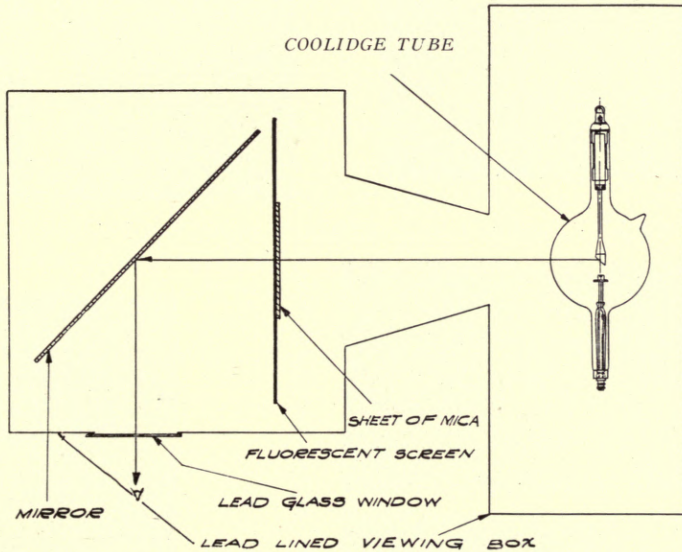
Arrangement of Coolidge Tube and Viewing Box for Inspection of Built-up Mica
